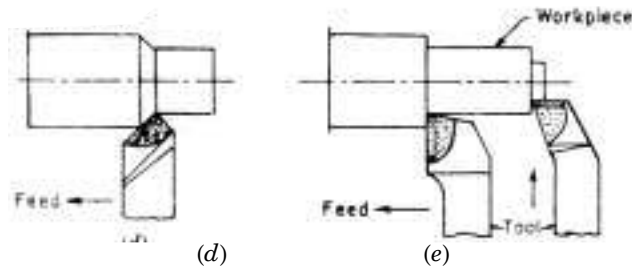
(*d*) shows a turning tool whereas a facing tool is shown in Fig. 1.41(*e*). A parting tool used to cut off the material is shown in Fig. 1.41(*f*). A boring tool is shown in Fig. 1.41(*g*).
